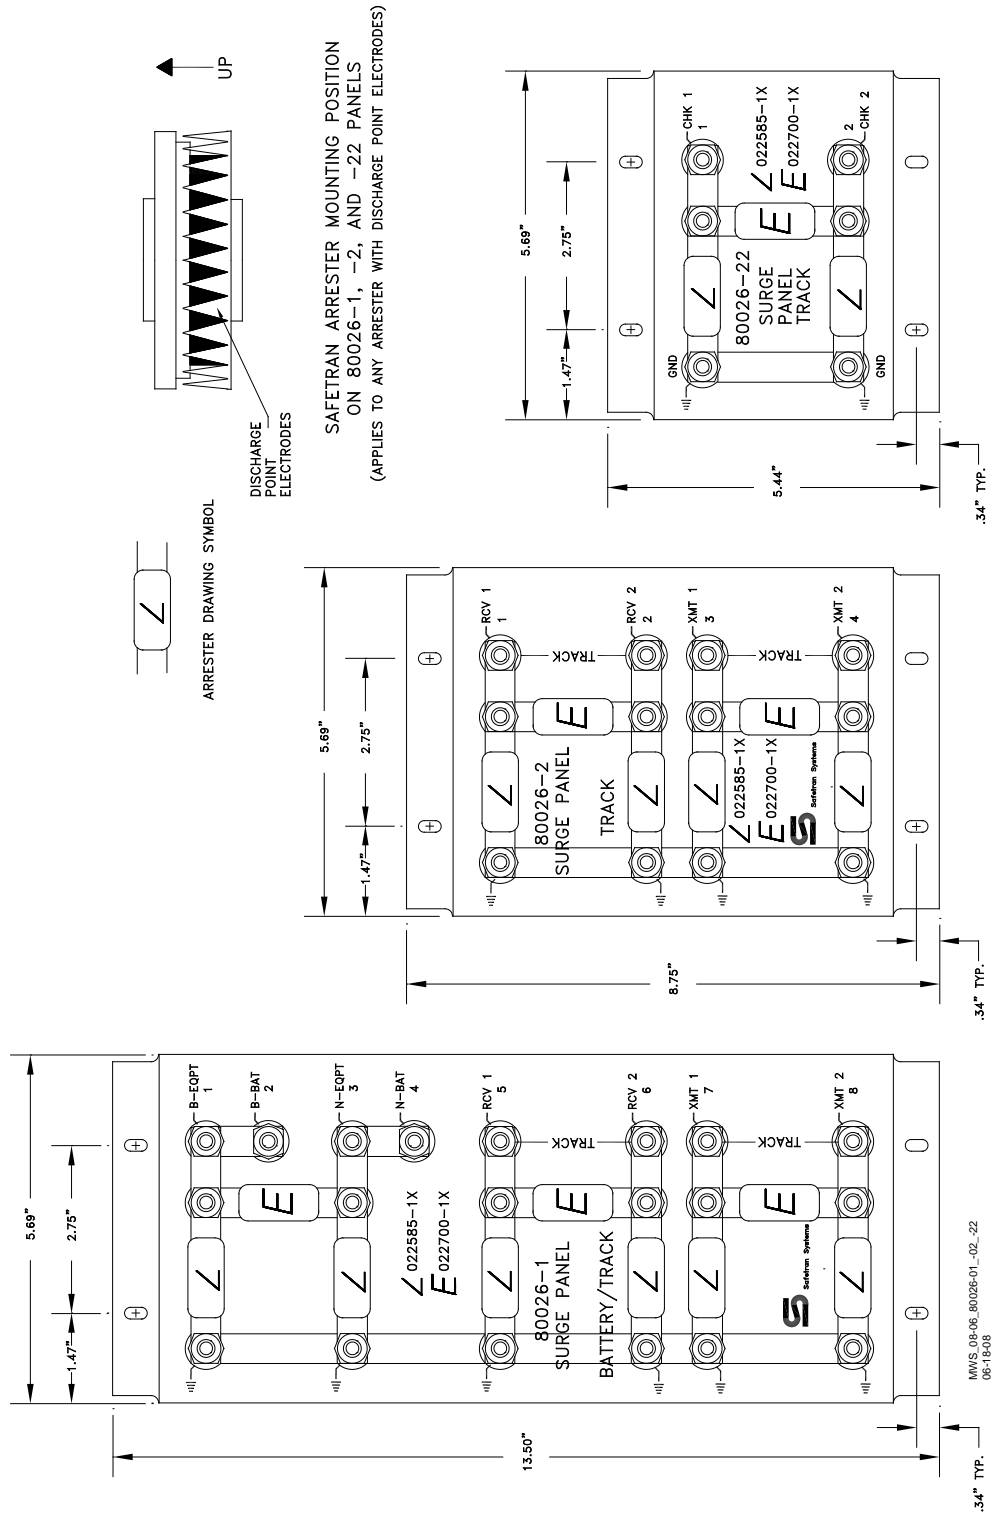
Wall Mount Surge panels, 80026-01, -02, and -22
